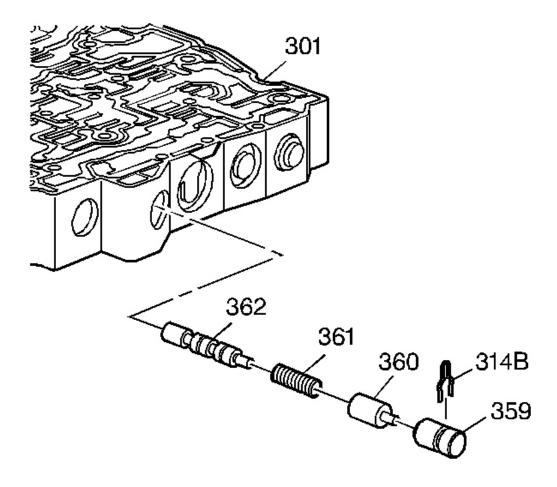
View Of 3-4 Shift Valve & 4-3 Manual Downshift Valve Components Courtesy of GENERAL MOTORS CORP.
